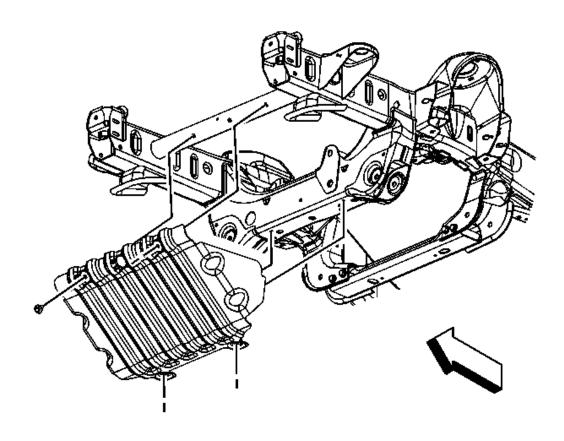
View Of Engine Shield & Bolts Courtesy of GENERAL MOTORS CORP.
